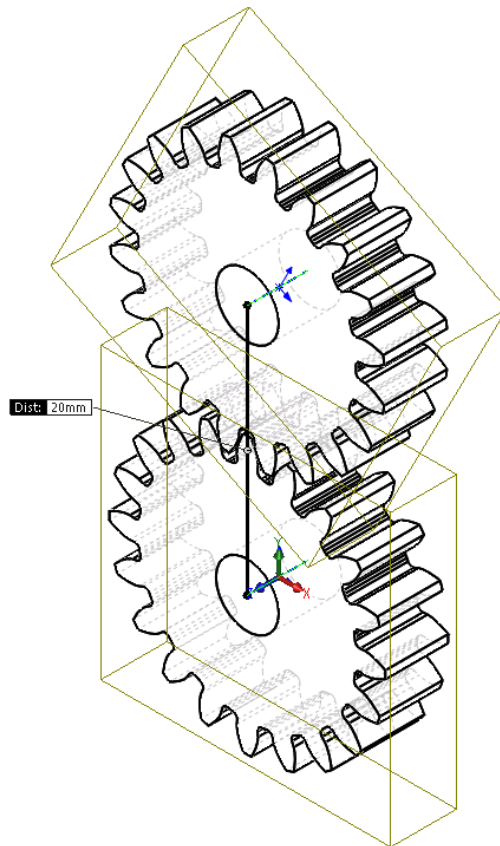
Assembling procedure in SolidWorks of a 3D spur gear pair.
